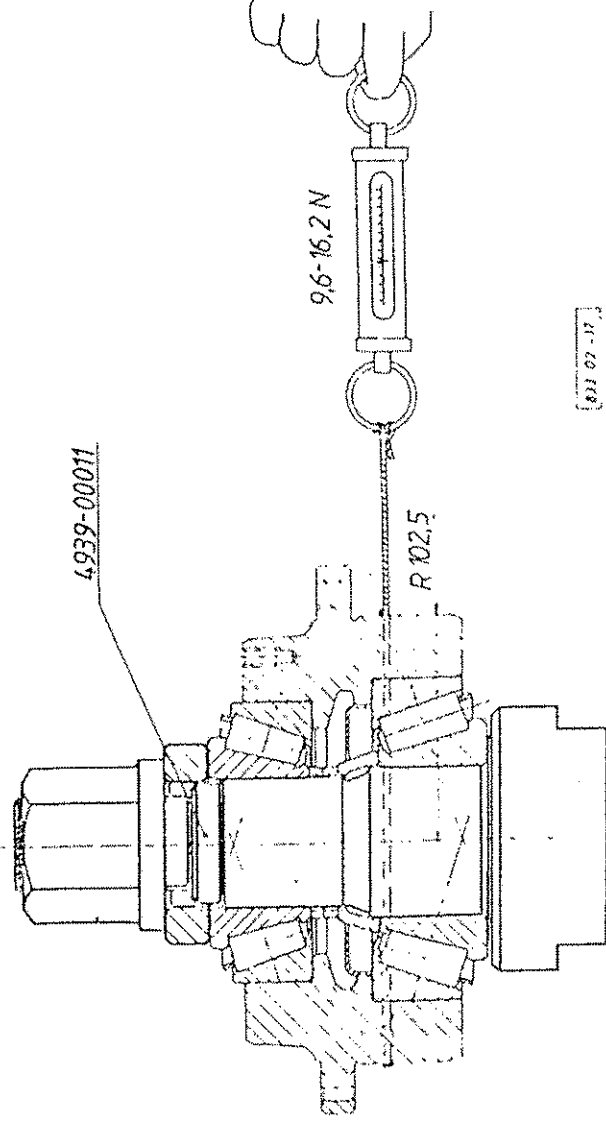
ADJUSTING THE BEARING PRELOAD
